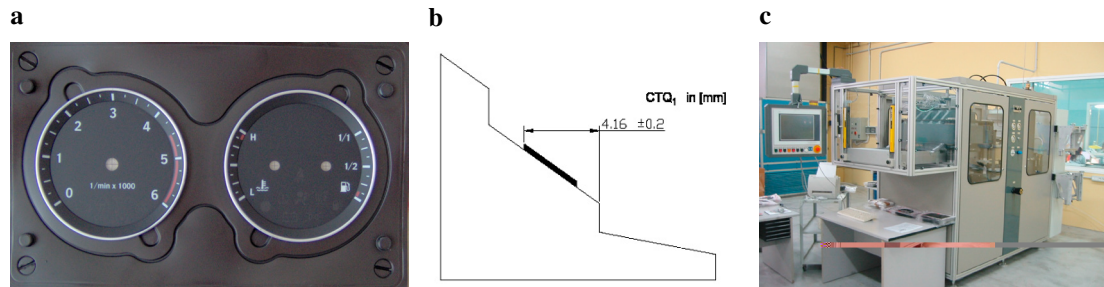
(a) Car dashboards; (b) CTQ; (c) Niebling machine.
